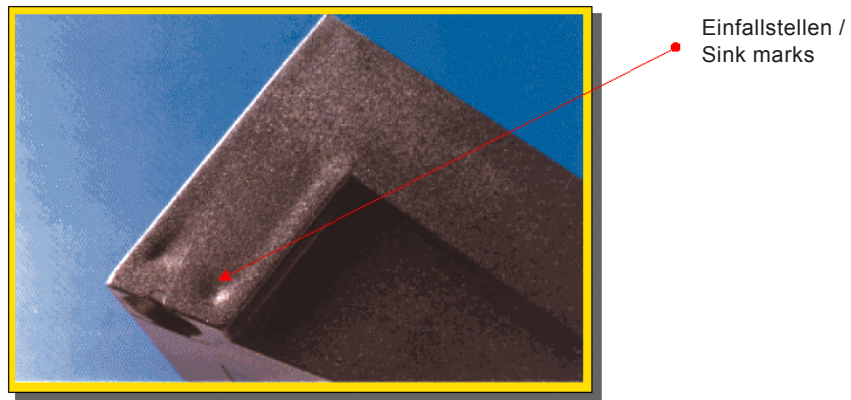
A component with sink marks caused by unfavorable gate dimensioning
